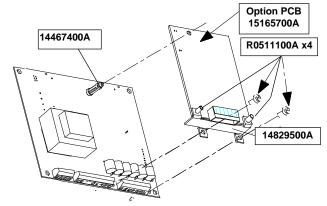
Mounting Modbus Plus Option PCB in Panel Mount Enclosure
